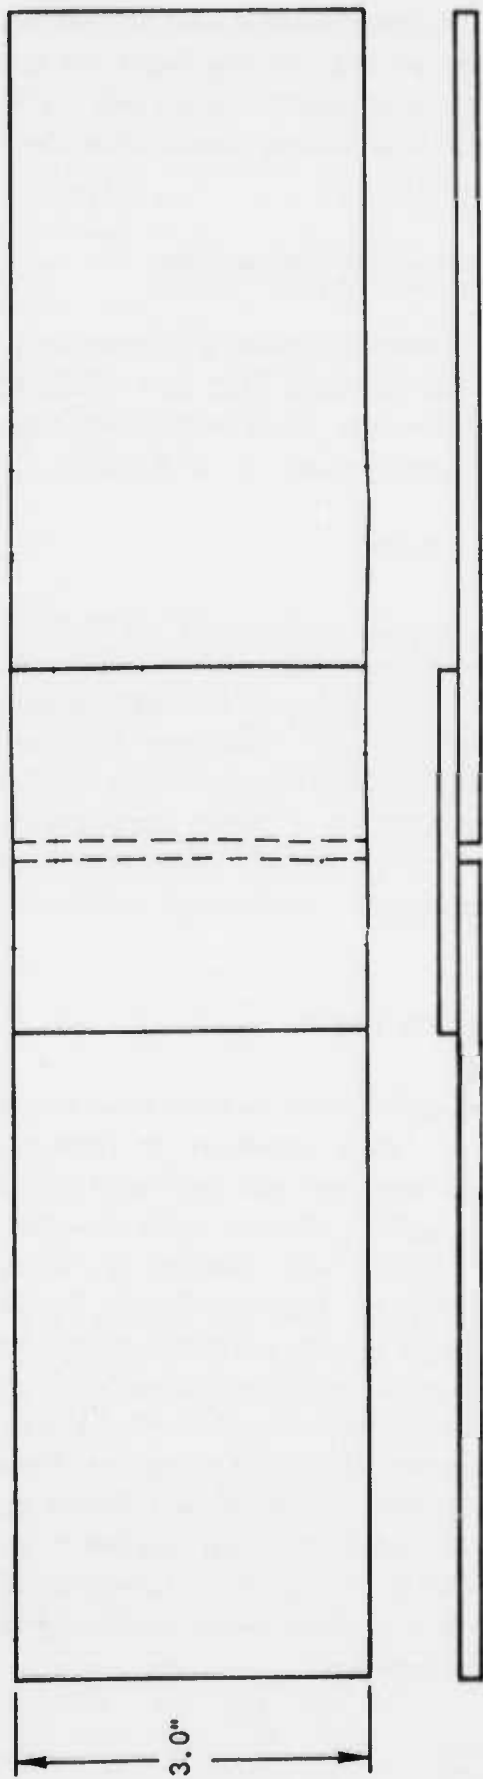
CENTERED ROW WELD PATTERN SPECIMEN (4 WELD SPACING)
